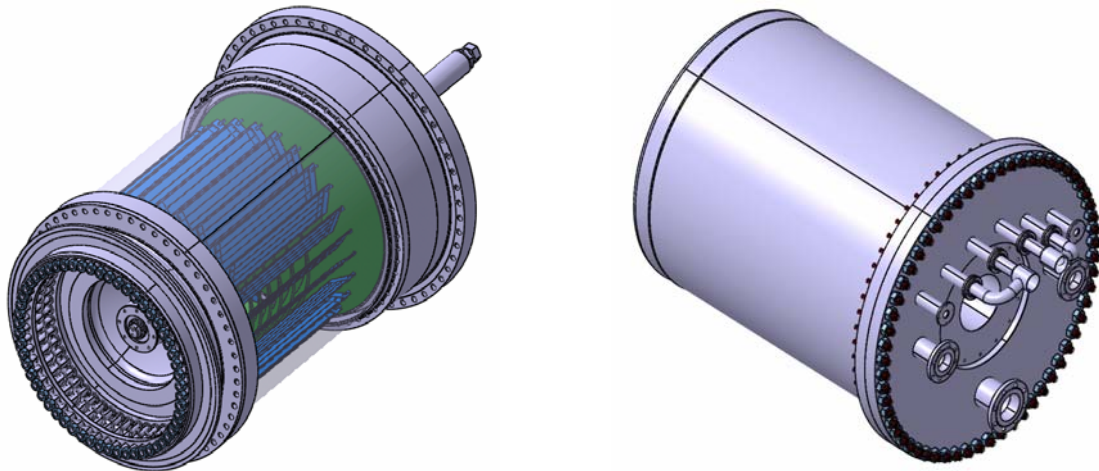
Drawing of the prototype torus pump as single unit (left without outer 80K shield and housing).
